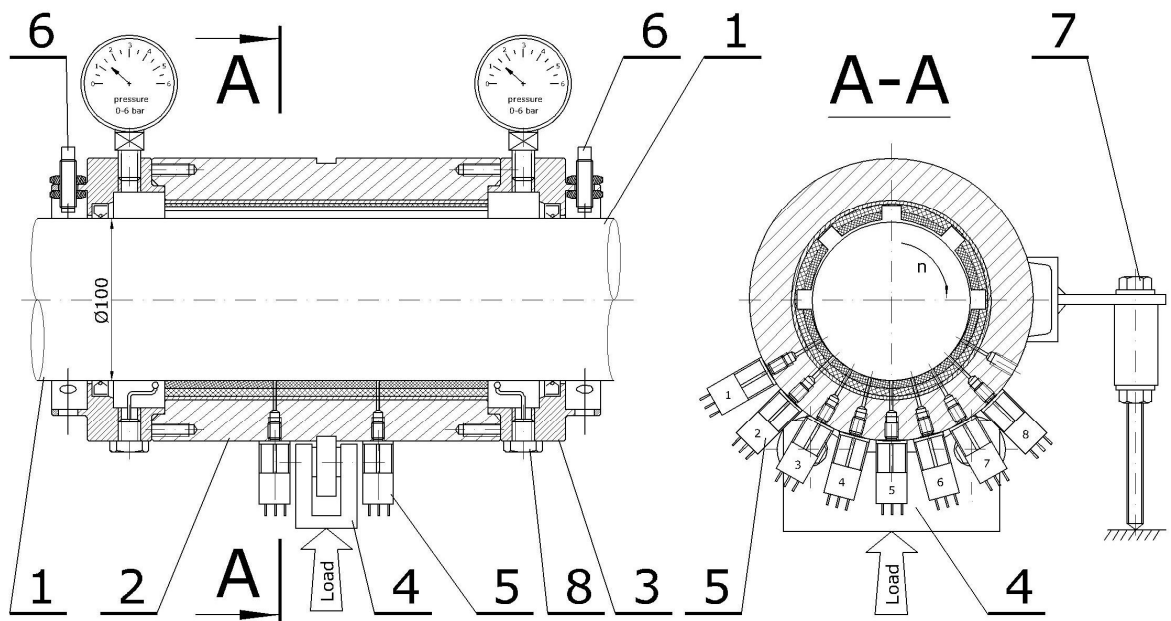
Test rig - tested bearing unit; 1-main shaft, 2- tested bearing housing with tested bearing located inside, 3- cover (right side) with seal, 4- support with roller bearings – load application location, 5- pressure sensors (in two surfaces, left and right), 6 – two pairs of proximity sensors, 7- arm with force sensor for twisting torque measurement
